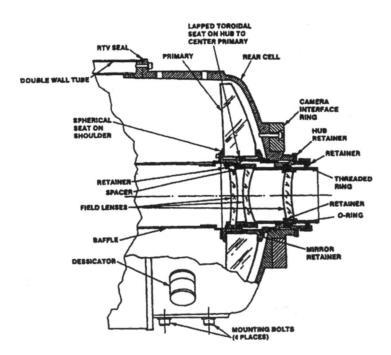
Sectional view of the rear (camera) portion of the catadioptric lens assembly.
